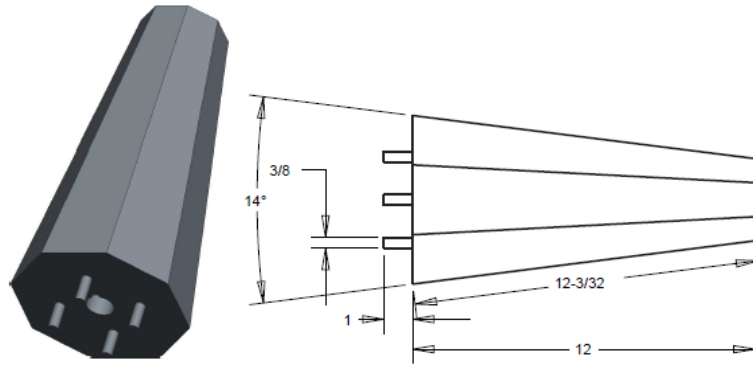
Tapered cone extension (left) and a schematic front view (right) (all dimensions in inches)
